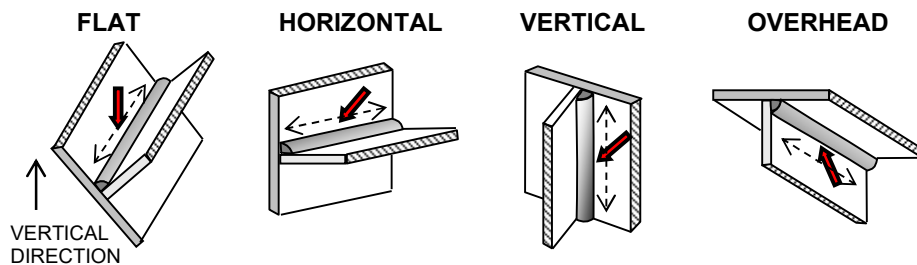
Welding Positions (Bold full-line arrows denote general nozzle direction; double headed broken line arrows show welding direction.)
